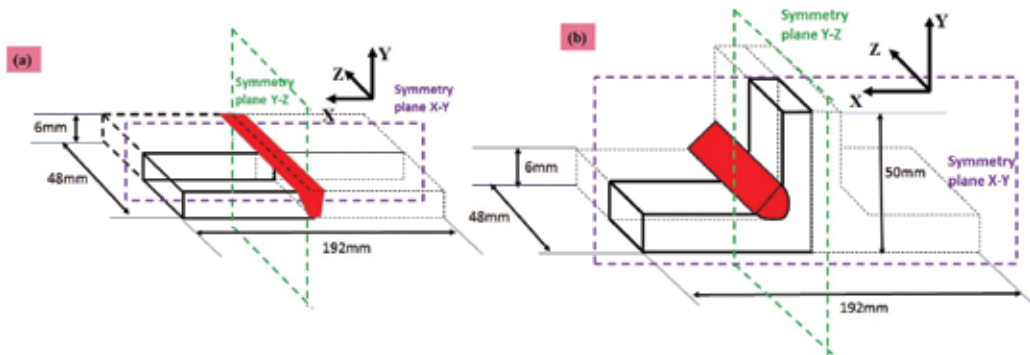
A schematic representation of weld geometry: (a) butt joint and (b) T-joint.
